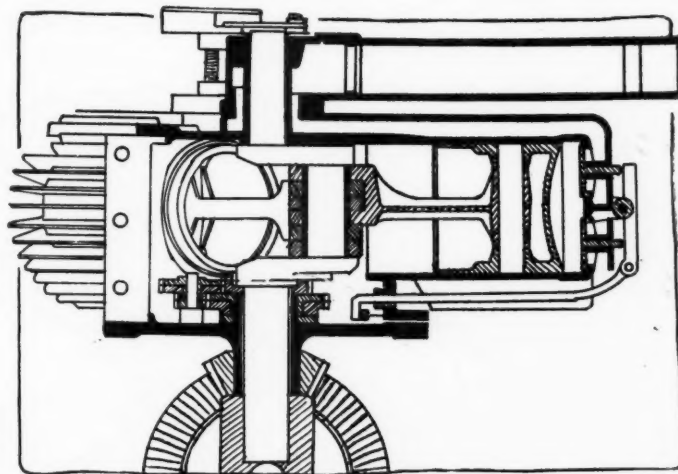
Part sectional elevation of Adams-Farwell rotary motor
